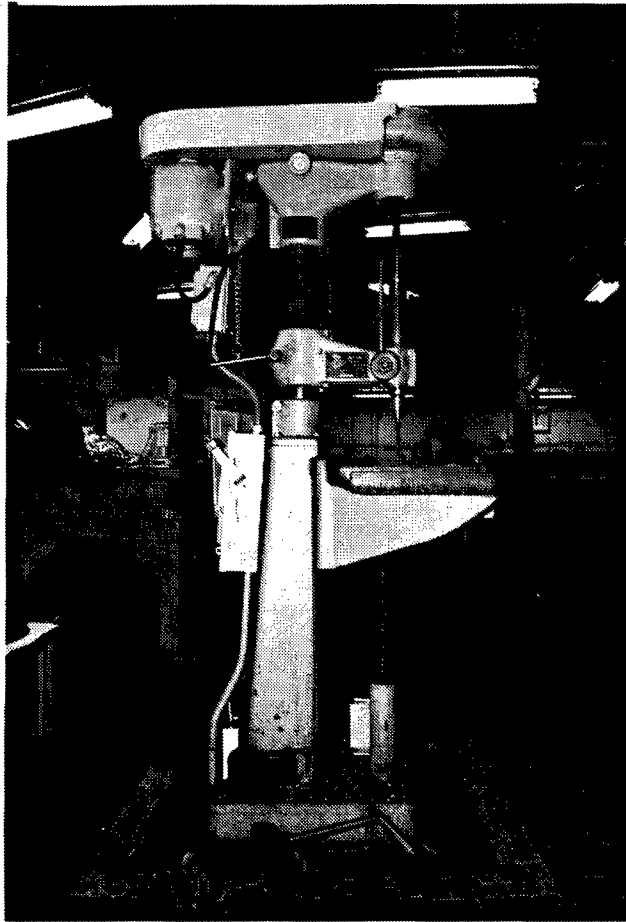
Building 500: A drill press, Model #16, manufactured by Buffalo Machinery, Buffalo, New York, located in the Mill Right Shop.
